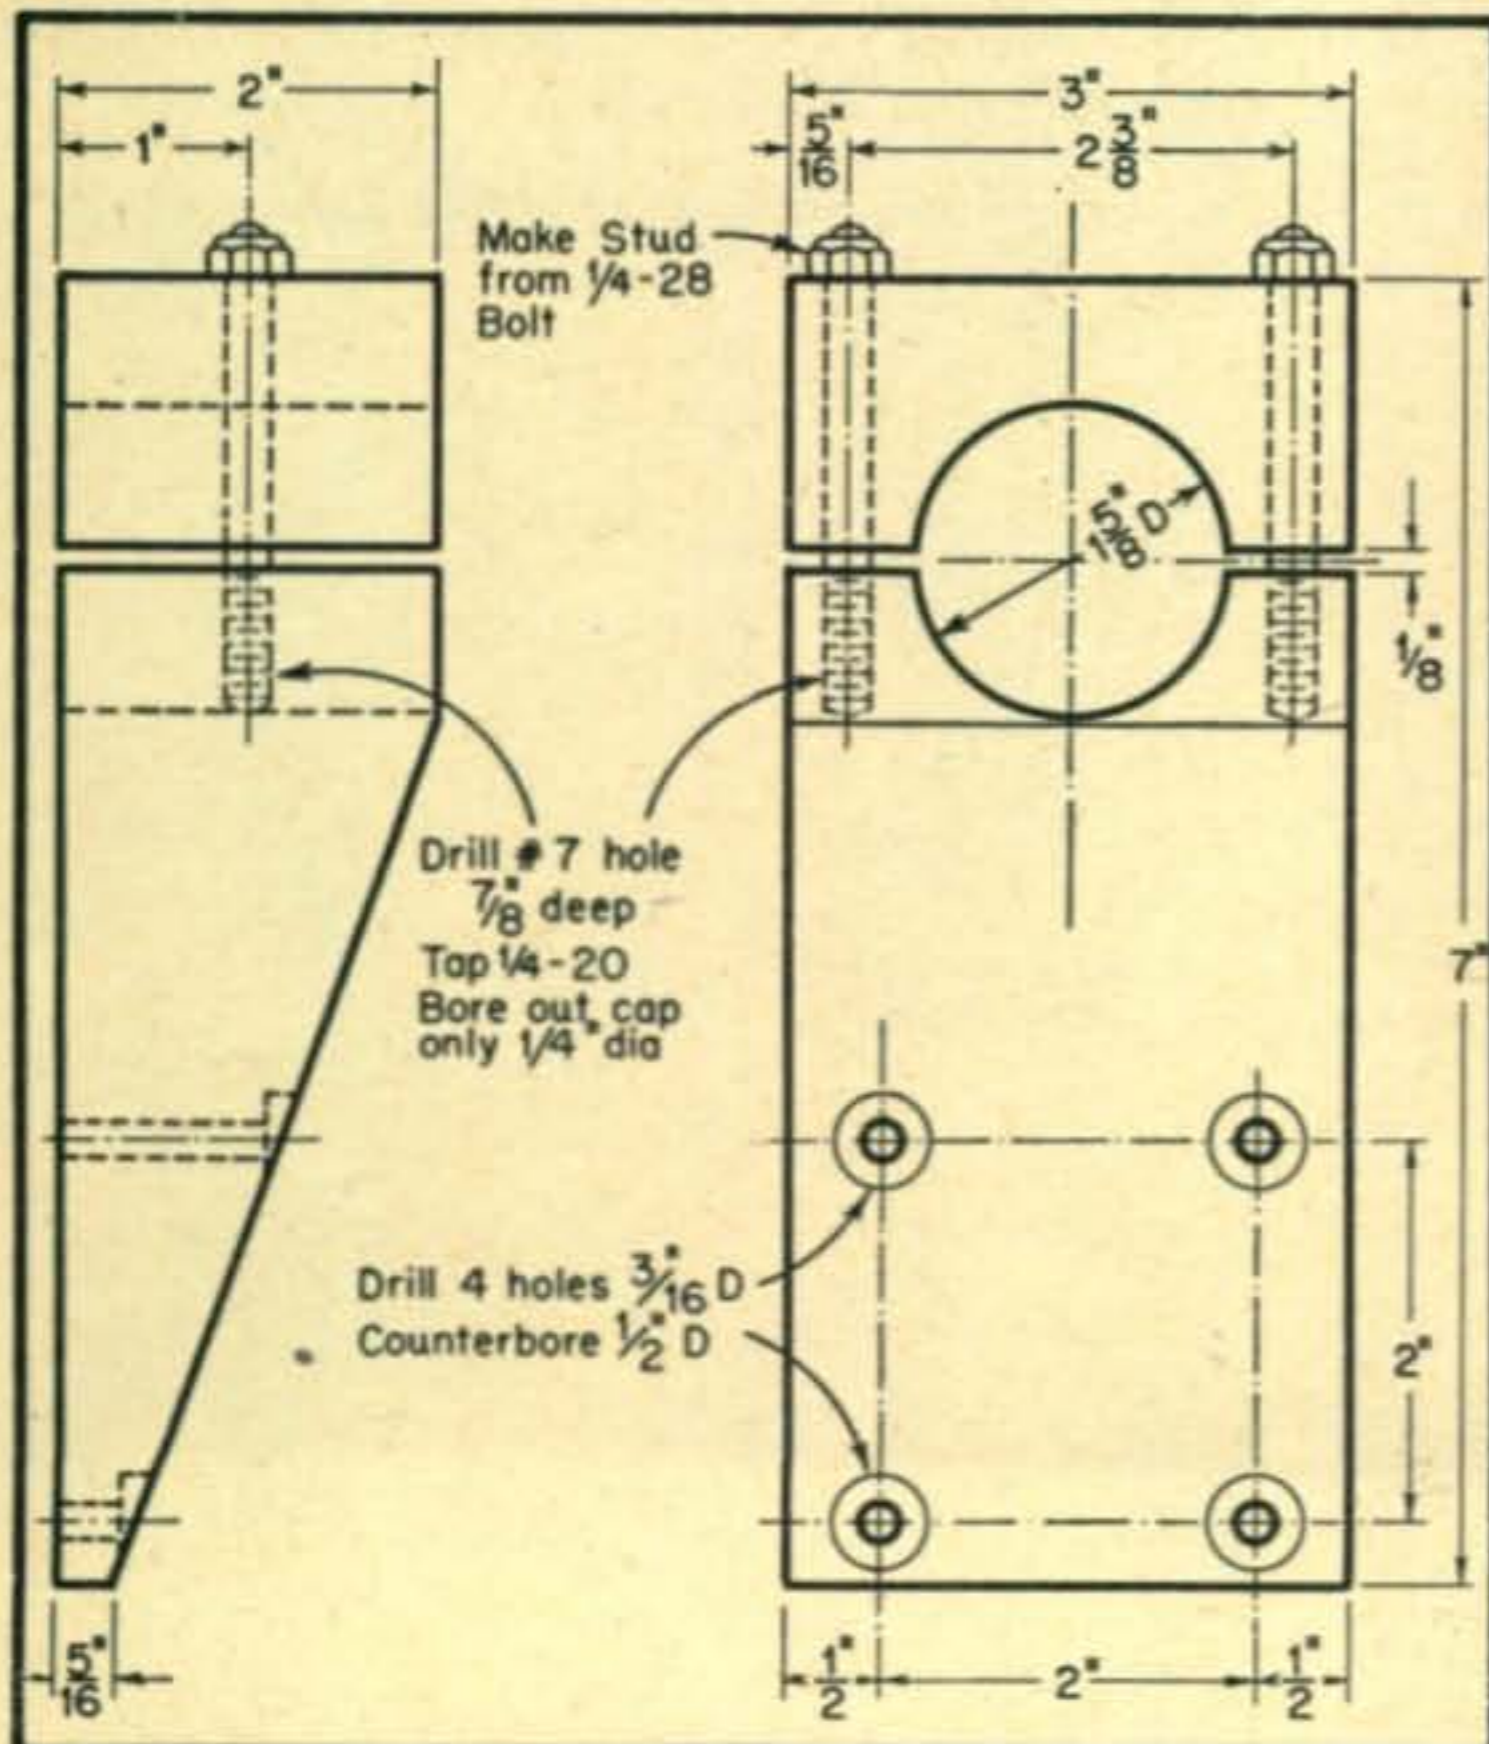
Mechanical details of the micarta clamps used to hold the beam elements.
